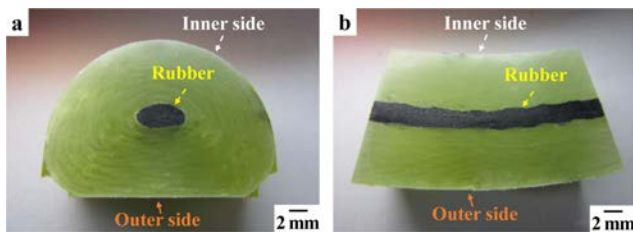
(a) Cross-section and (b) longitudinal-section specimen photos of the 9th prototype
